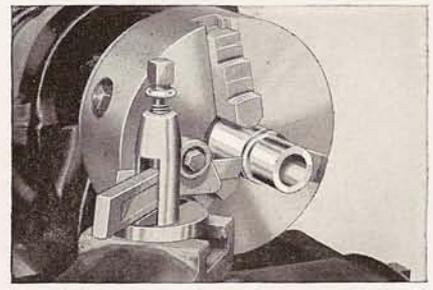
Making a Bushing Complete without Removing from the Chuck.
